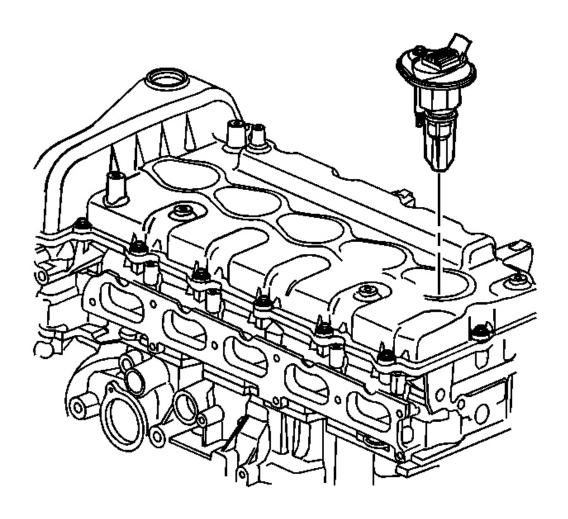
View Of Ignition Control Module Courtesy of GENERAL MOTORS CORP.
